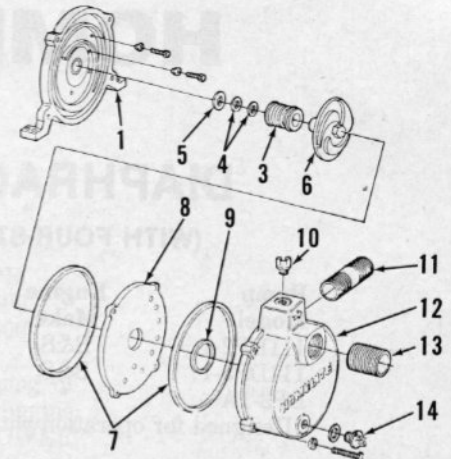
Exploded view of Model XLS2-1, XLS2-1A and XLS2-1B centrifugal pumps. Refer to Fig. HL12-1 for parts identification.
